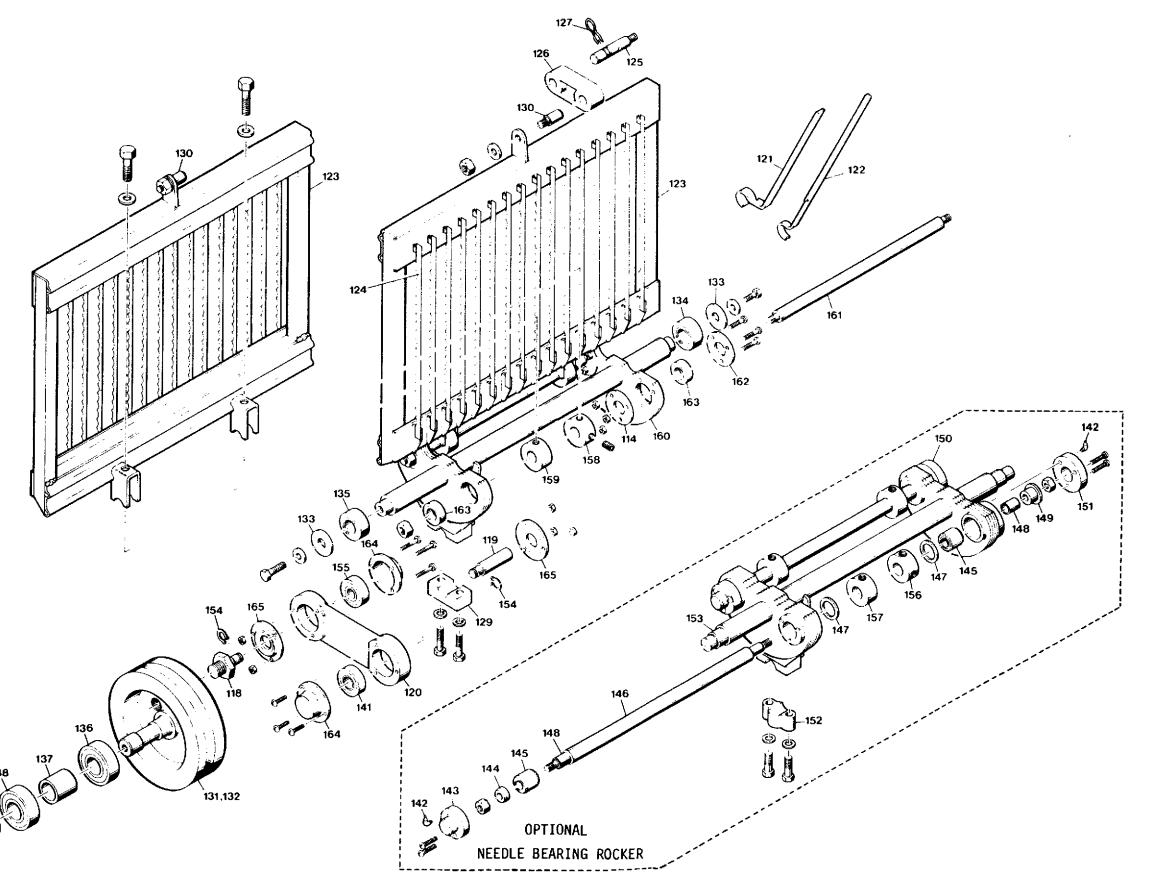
Rocker Blade Frame Assembly and Needle Bearing Rocker
